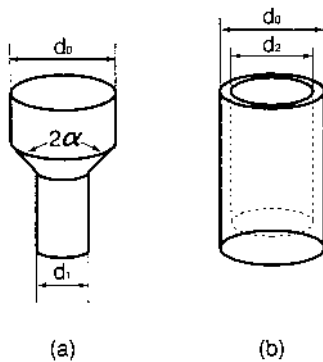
Dimensions of extruded products, d_0 . Billet's diameter, d_1 . extruded rod's diameter, d_2 . Extruding punch's diameter. (a) Extruded rod; (b) Extruded can.
